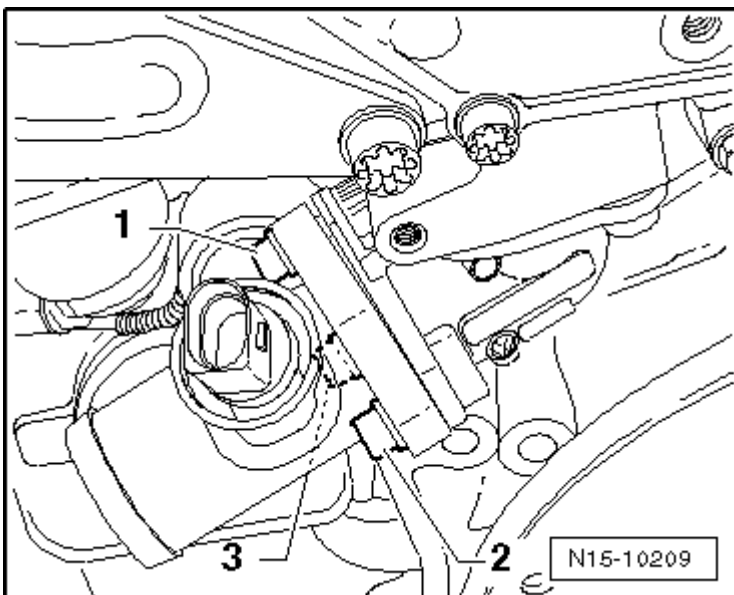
Removing Three Mounting Bolts On Coolant Connection
